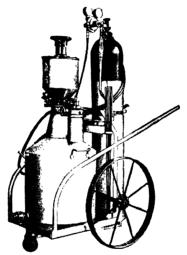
A portable oxy-acetylene welding station with an acetylene generator
